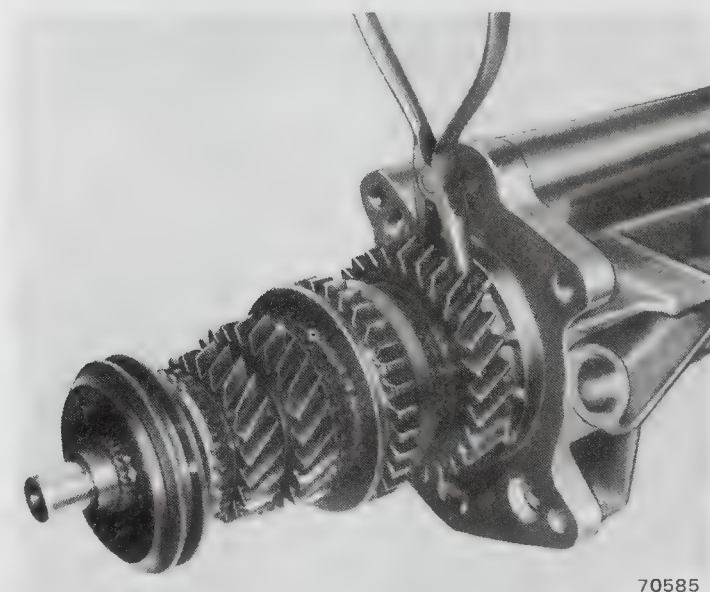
B-57 Output Shaft Rear Snap Ring Removal/Installation
